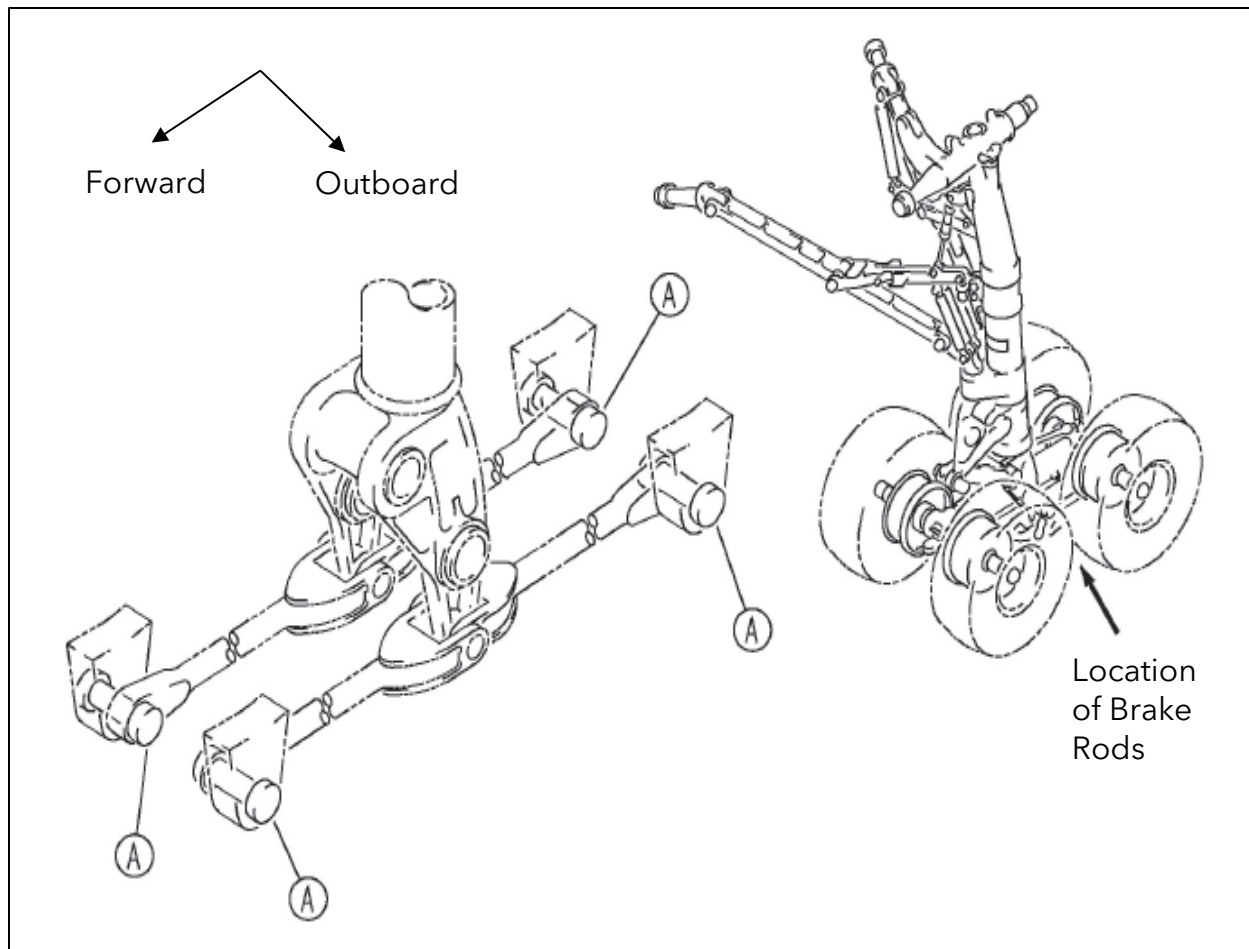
Aircraft Maintenance Manual schematic showing brake rods. The lines labeled "A" point to brake rod attaching hardware at the four brake assemblies on the left main landing gear assembly. Copyright © Boeing. Reproduced with permission. Note: schematic has been altered for clarity from original source.
